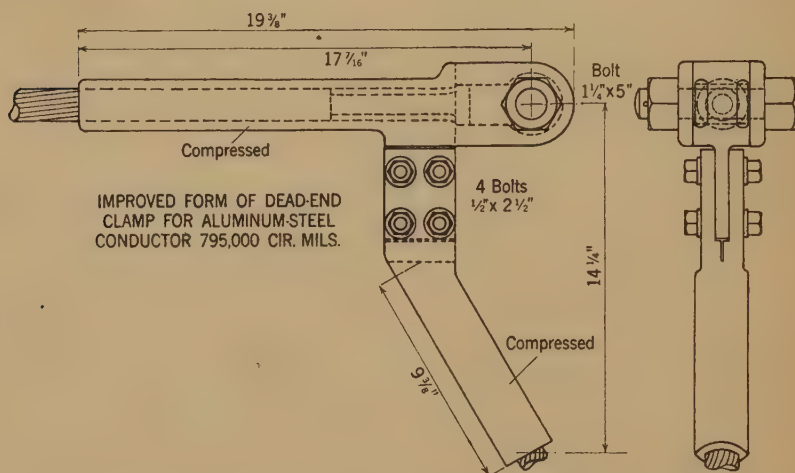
Compression type of dead-end clamp for aluminum-steel cable.
